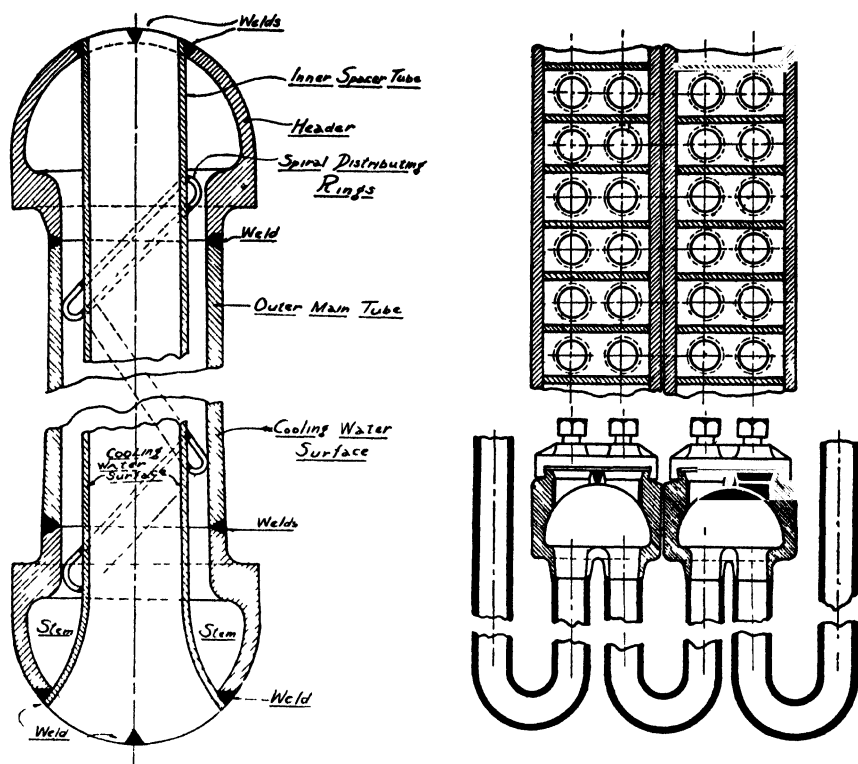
, (left). Enlarged view of condenser tube unit. Fig. 17, (right). Assembly of economizer unit.
